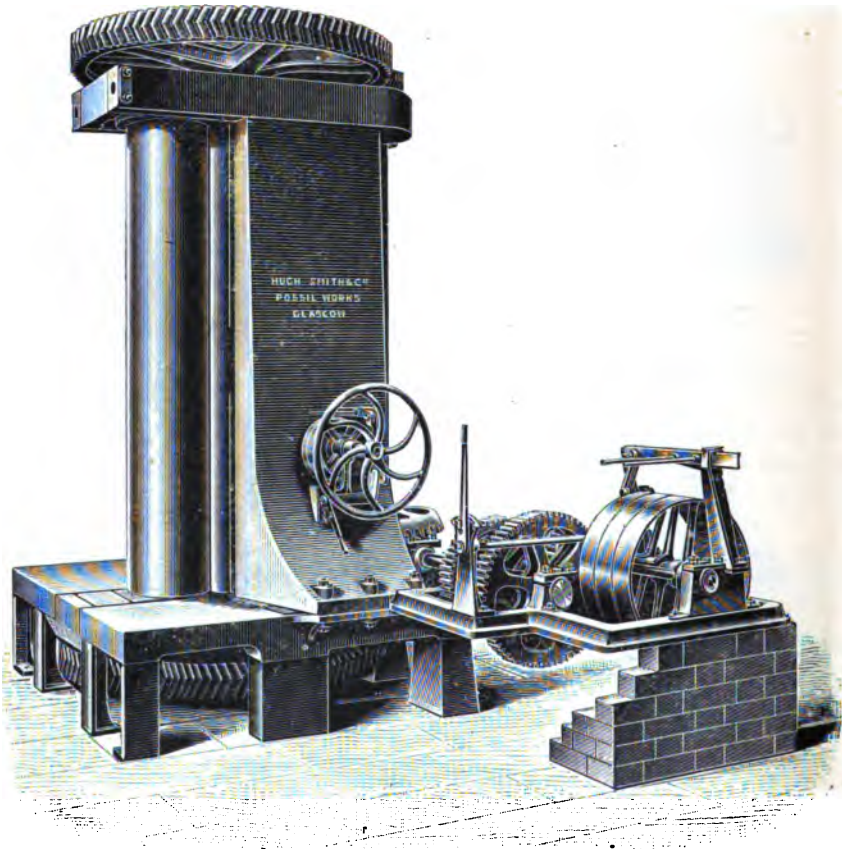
Machine with vertical rolls for bending boiler plates.
